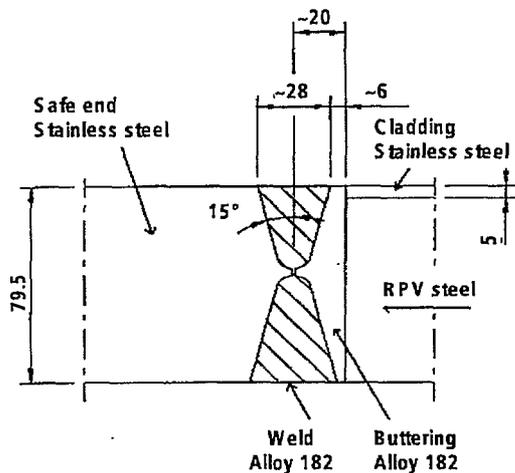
Schematic showing the nozzle to safe end weld. All dimensions are in mm.
